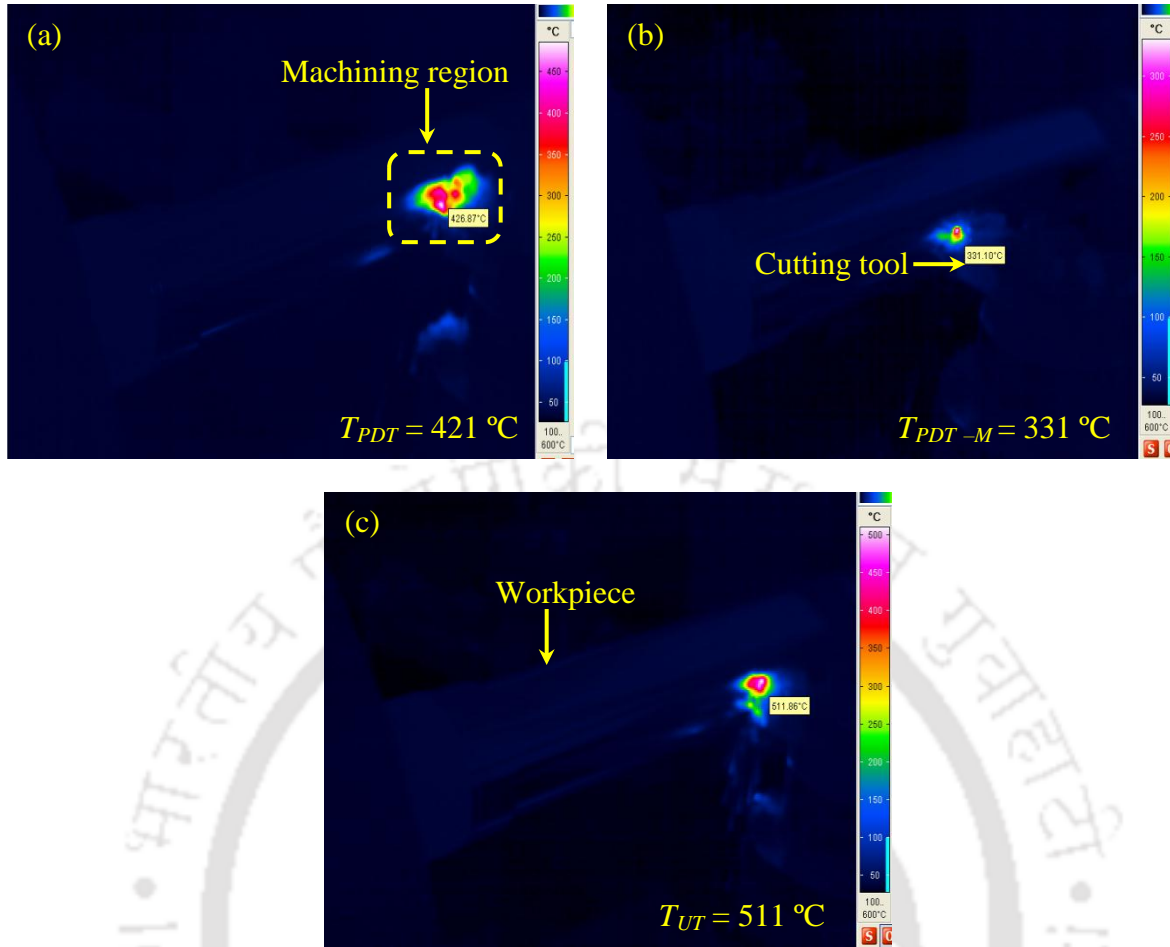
Thermal micrographs during machining with (a) uncoated perpendicular micro-textured cutting tool (b) MoS₂ coated perpendicular micro-textured cutting tool and (c) un-textured cutting tool
